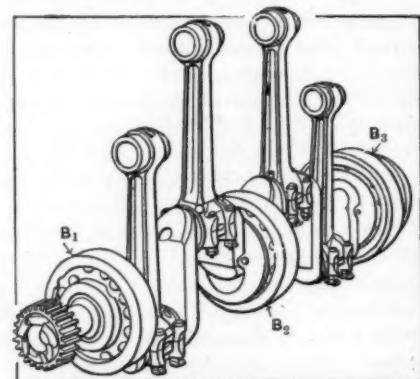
Crankshaft construction showing the use of annular type ball bearings
